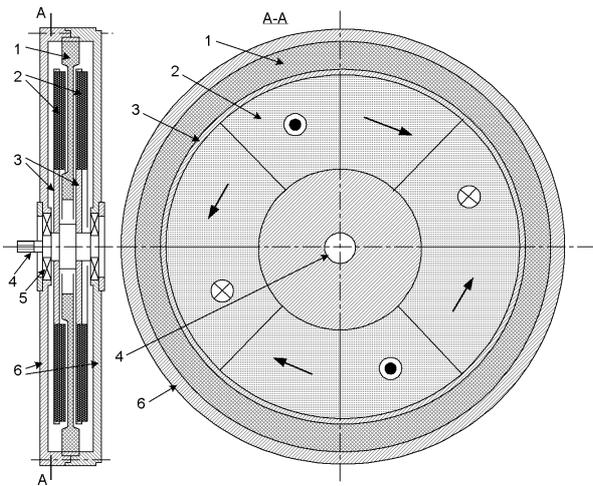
Ironless double-sided PM brushless motor of disc type: 1 – stator winding, 2 – PMs, 3 – rotor, 4 – shaft, 5 – bearing, 6 – frame [13].
